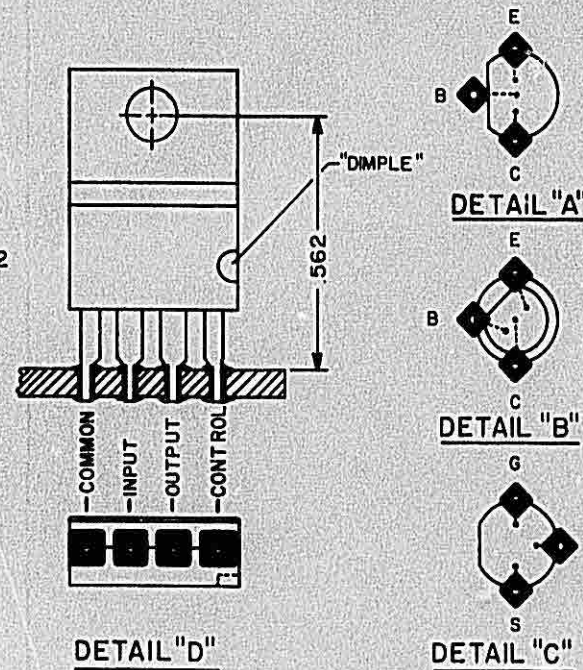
KN 72 P/C BOARD ASSEMBLY
